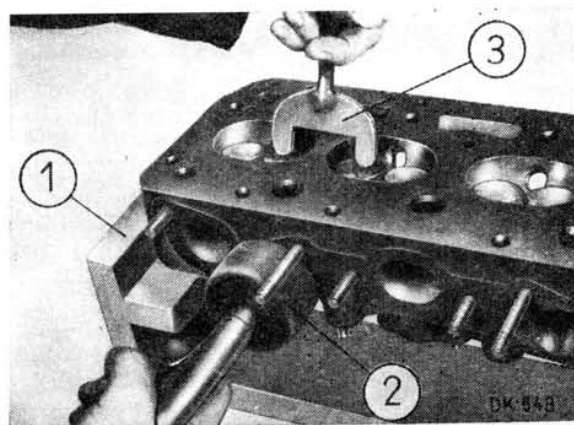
/7 - Valve Leakage Test with Compressed Air
